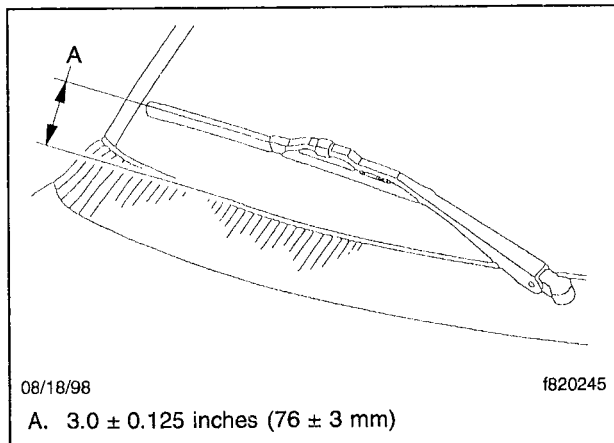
, Passenger-Side Windshield Blade Park Dimension
